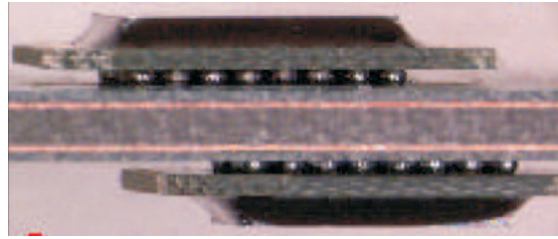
Multiple BGA Packages on PCB Should not Be Overlapped
